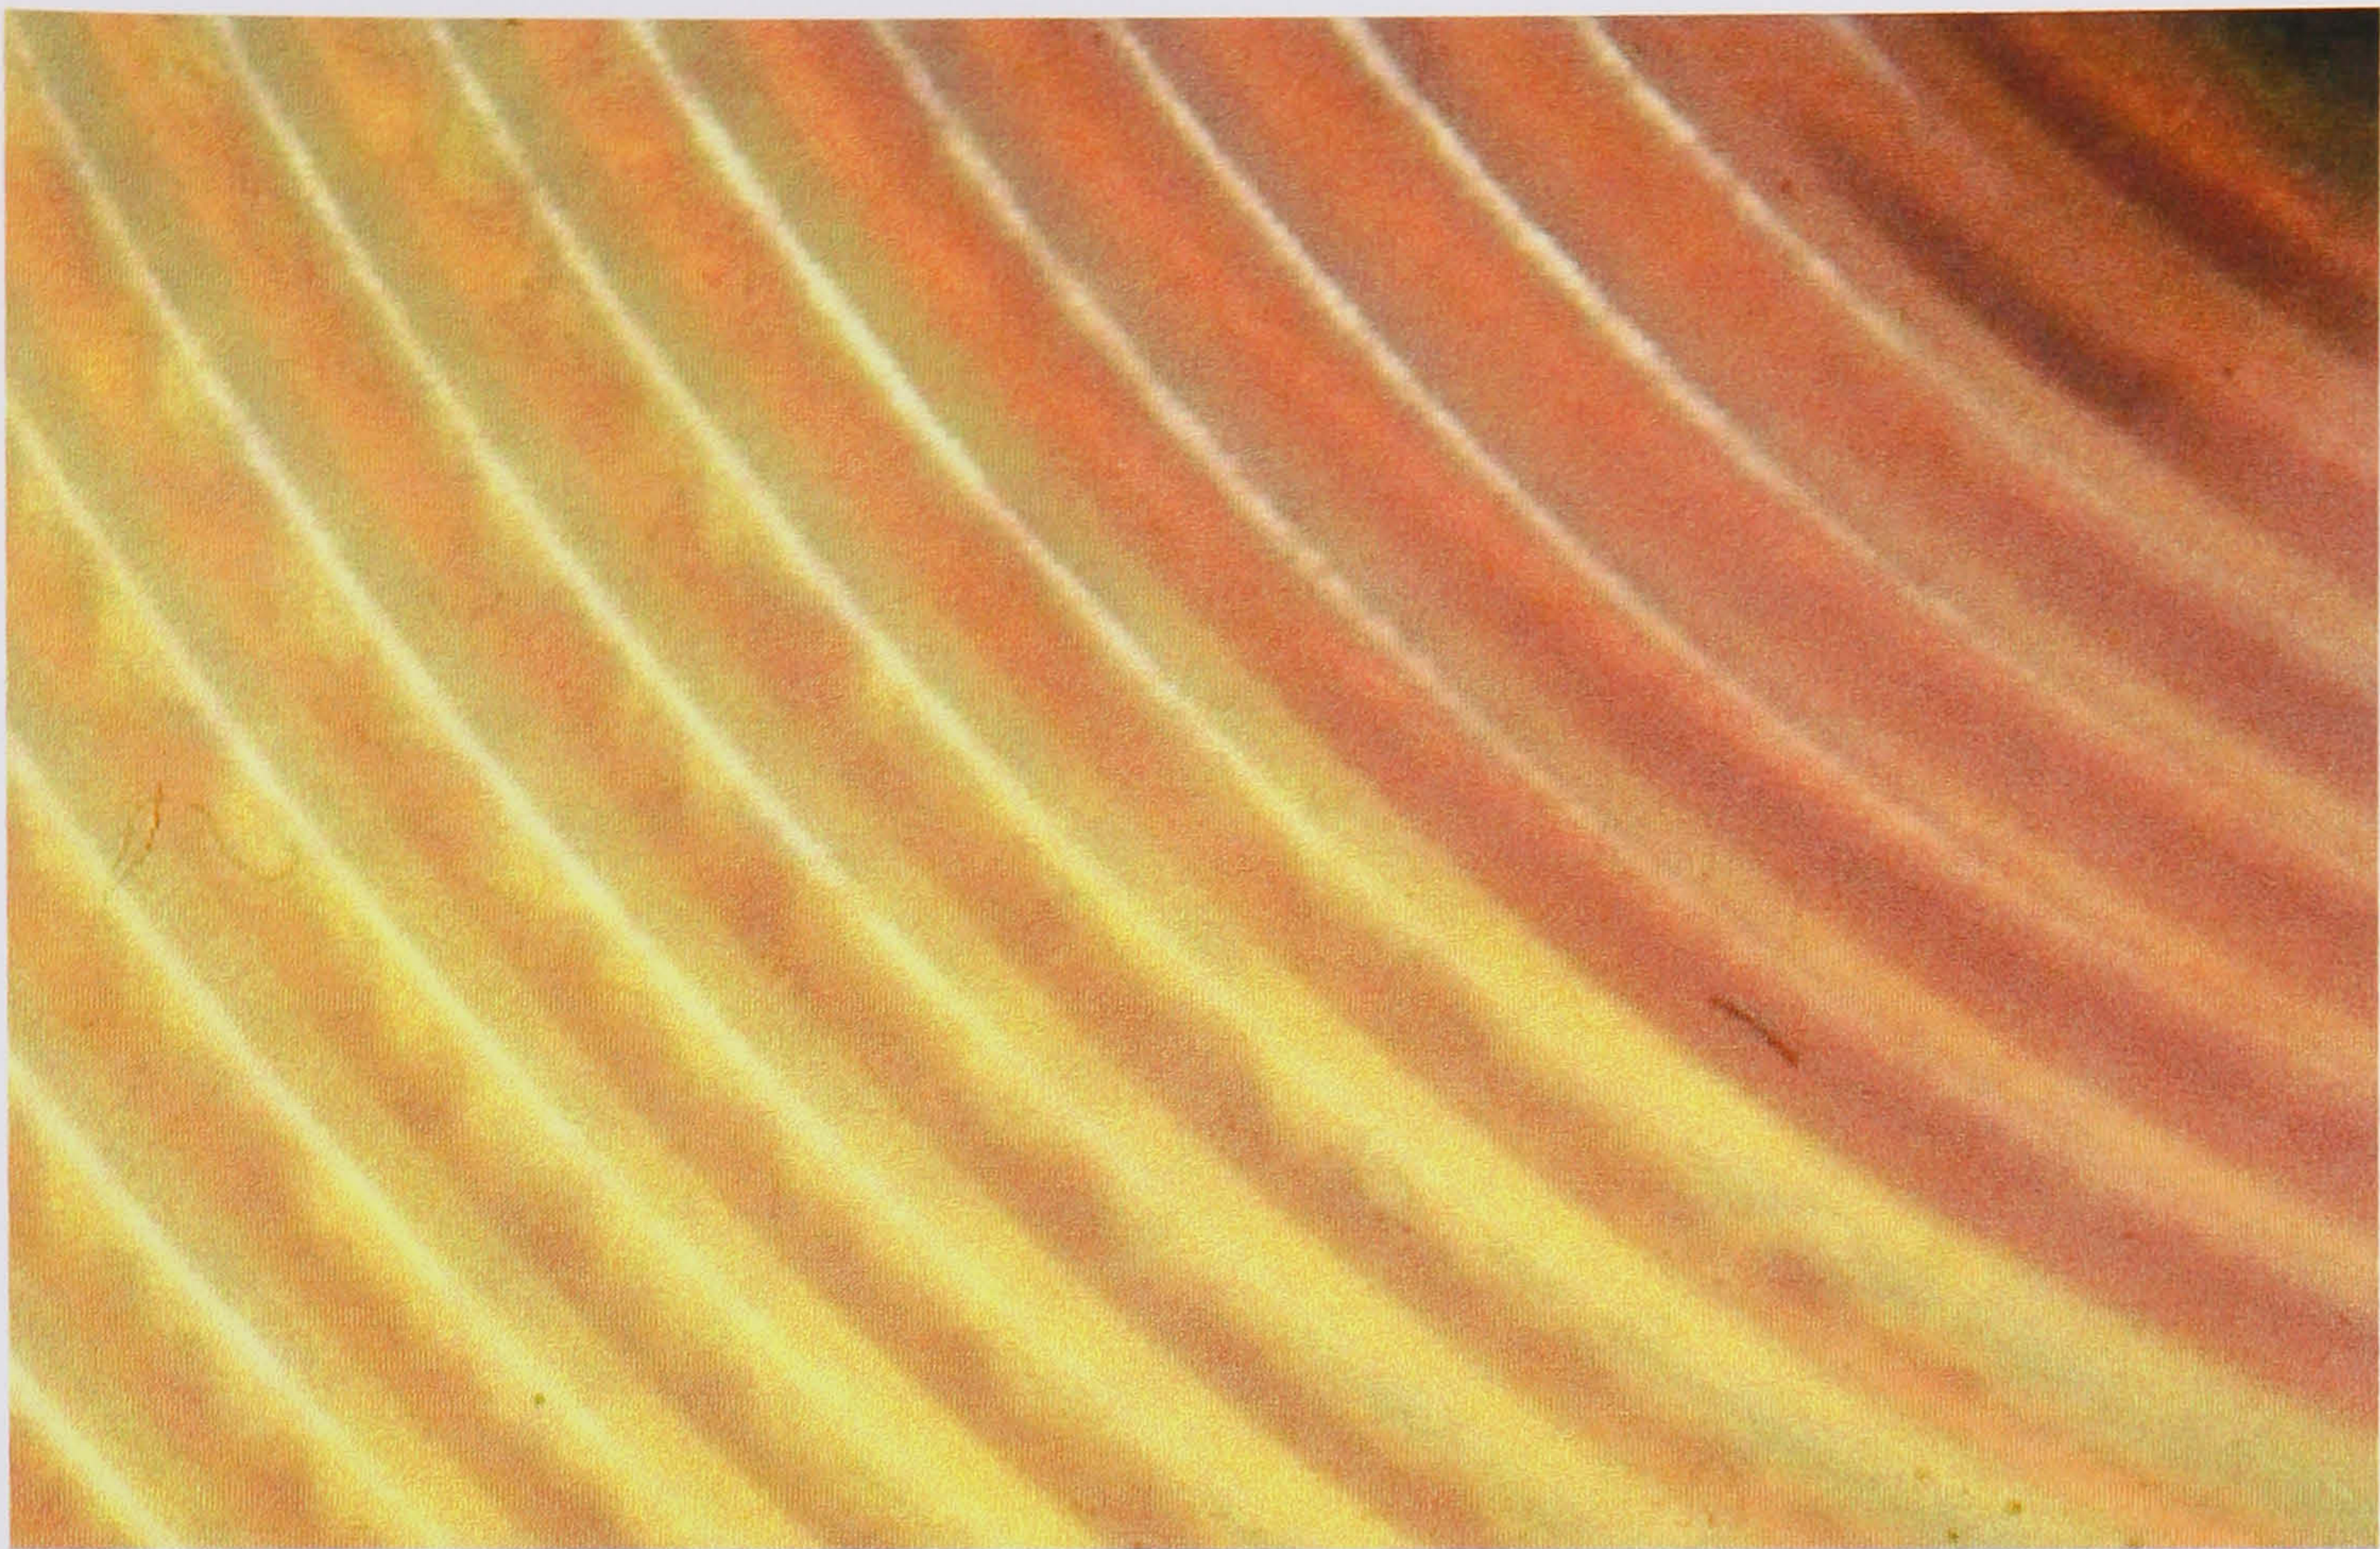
shows wave mixing building at position 3 [Sutherland 1999]
